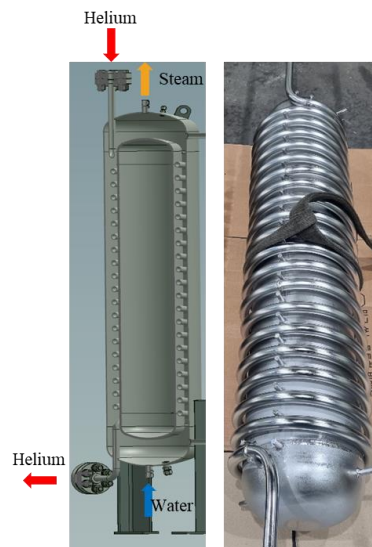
Design of steam generator (left) and the core tank with helical tube (right).
